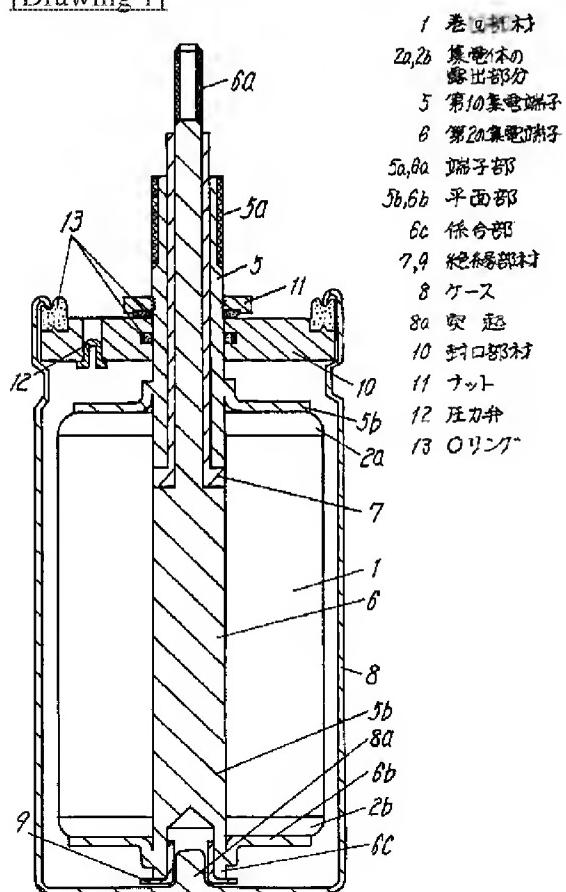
The sectional view showing the capacitor by a 1st embodiment of this invention
